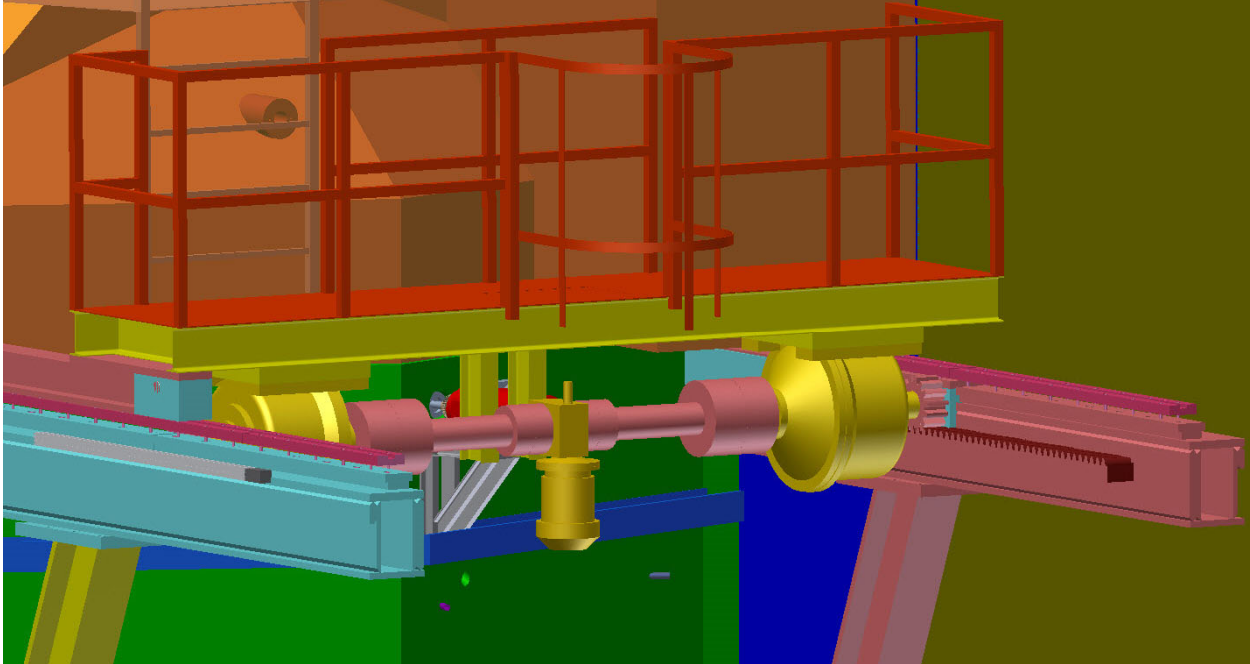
Drive mechanism of the movable top shield. A single motor drives two planetary gearboxes, turning gears that engage gear racks on the gantry structure, creating synchronized motion. South MTS drive mechanism is shown, north is similar.
